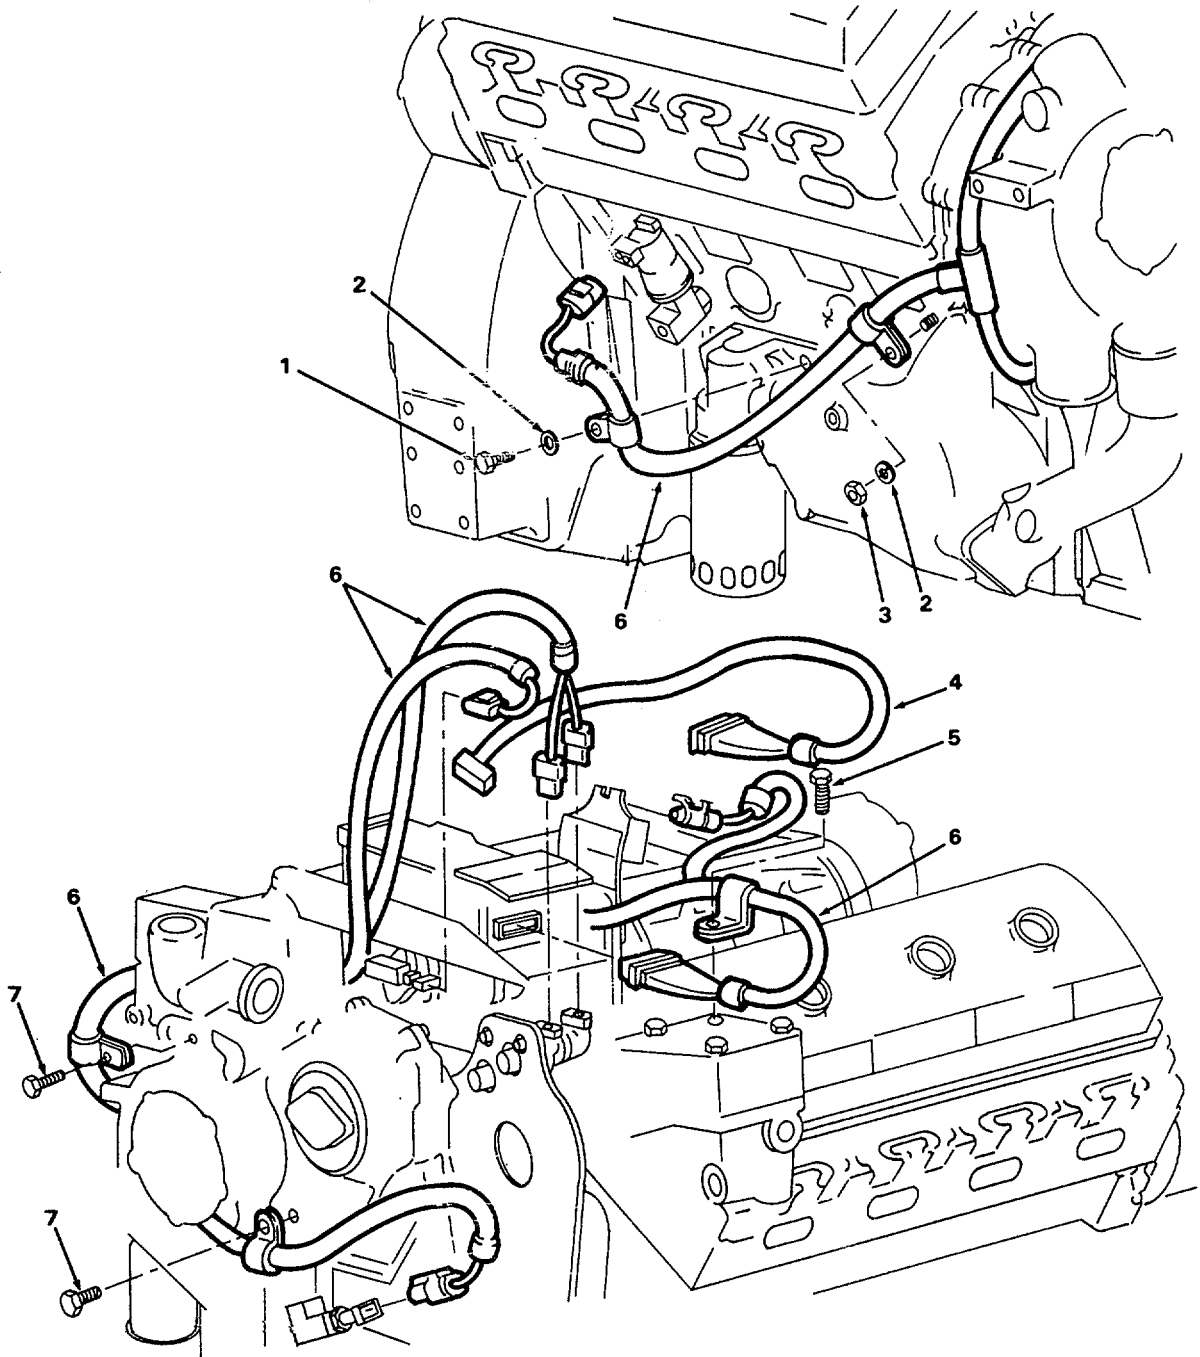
Electronic Control Wiring Harness, Sheet 1 of 2
